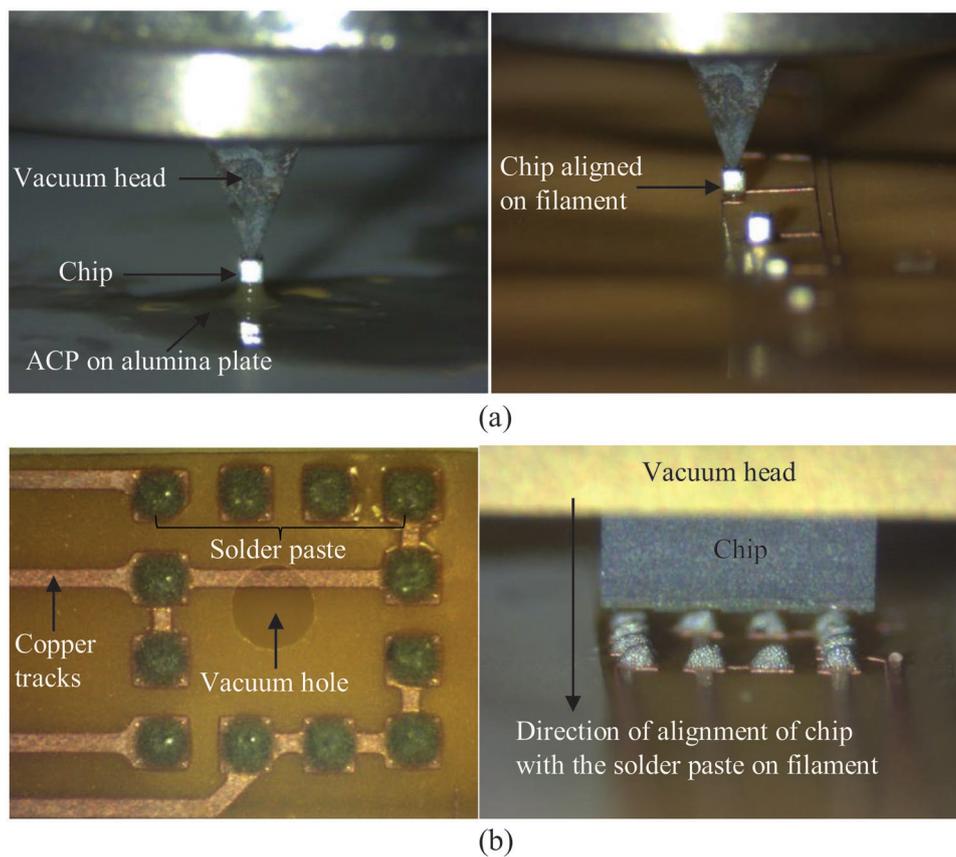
a) Mounting of a thermistor chip with ACP and b) mounting of components on filament using stencil printed solder paste.
